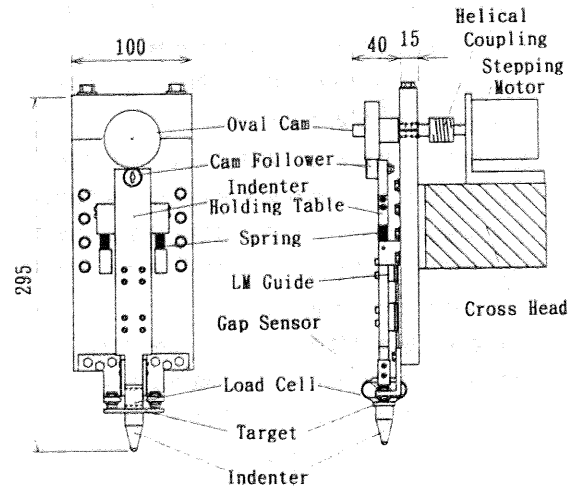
Mechanism of Driving Part of an Indenter.
